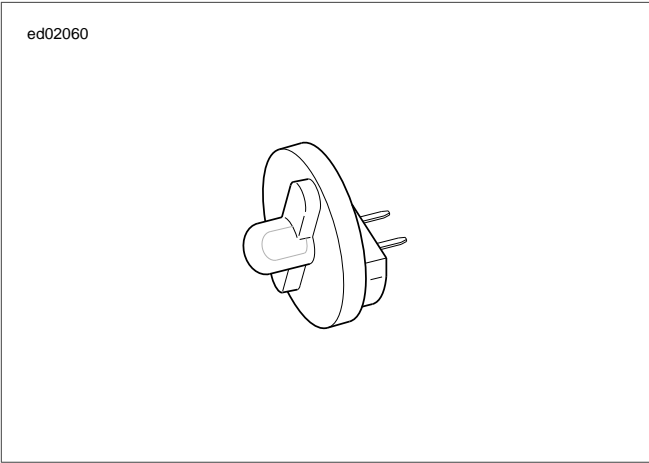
Fuel Injector Test Lamp (Part No. HD-34730-2C)
